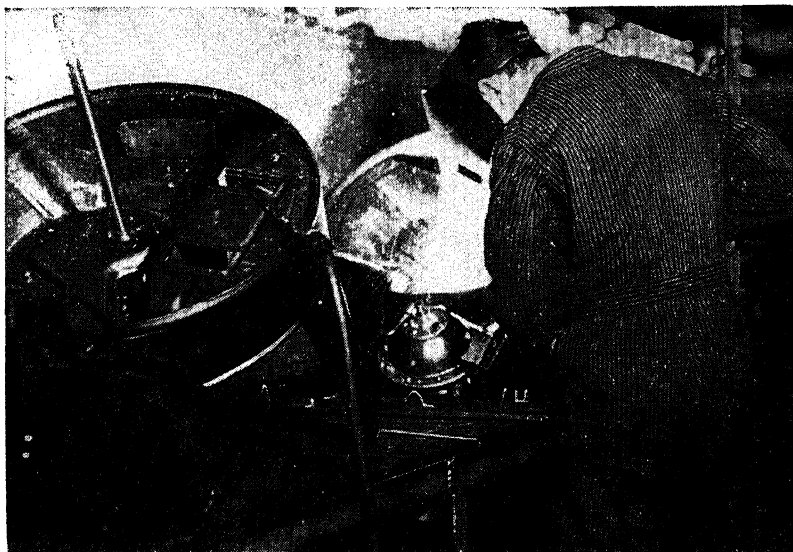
Arc welding the pressed steel framework for a washing machine. This construction is much more rigid and permanent than the bolted construction used formerly.
